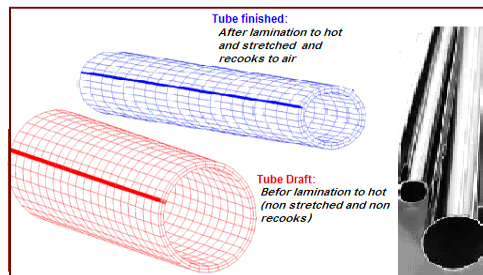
Draft tube (large diameter) and finished tube (small diameter).
